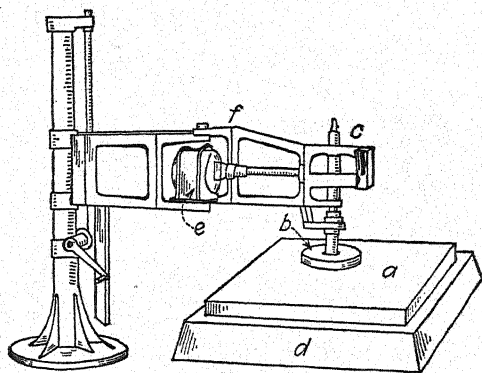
Motor-driven marble-polishing machine. *a.* Marble slab *b.* Carborundum head. *c.* Shaft. *d.* Bed. *e.* Motor. *f.* Polisher frame (Courtesy of Lincoln Iron Works.)
